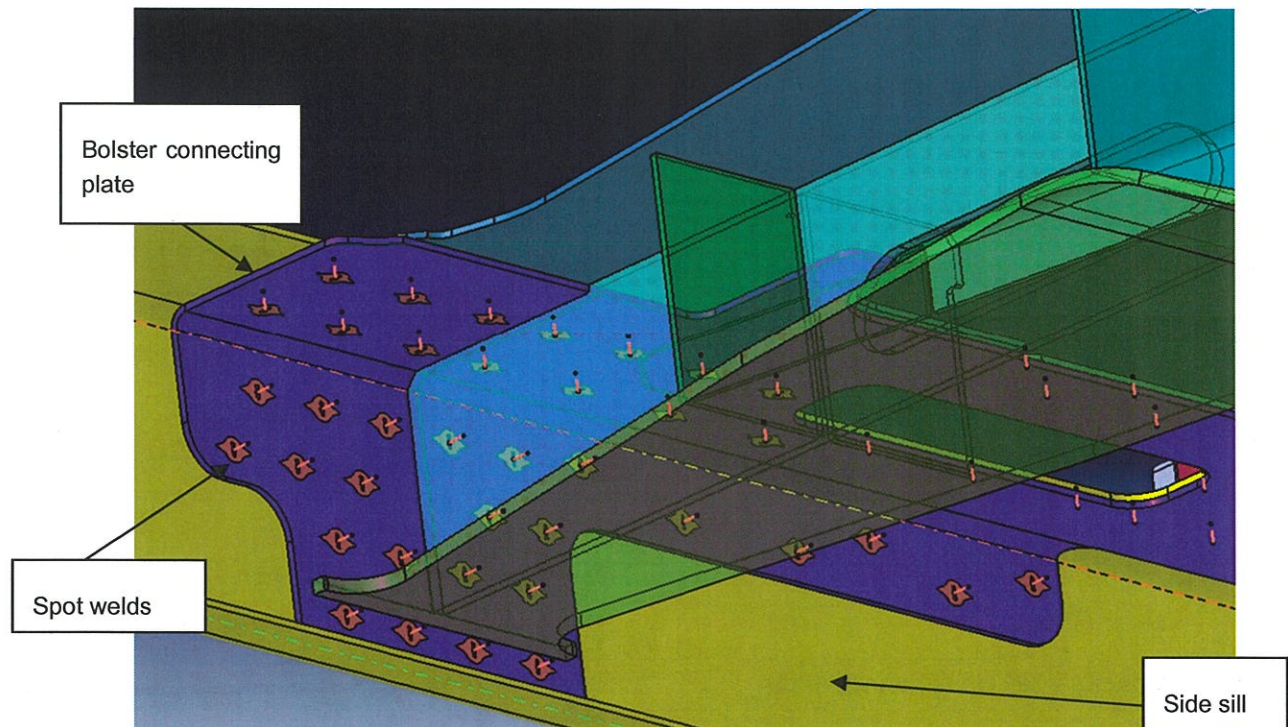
, Side sill to bolster connecting plate (with spot welds).
